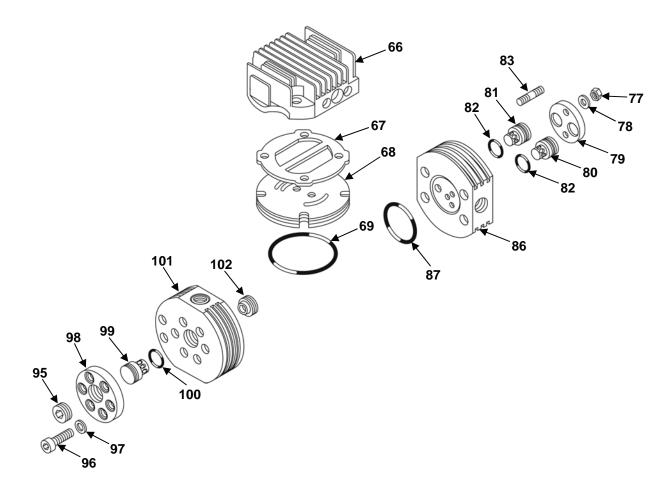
Disassemble Air Compressor, First, Second and Third Stage Components. (Sheet 1 of 2)
